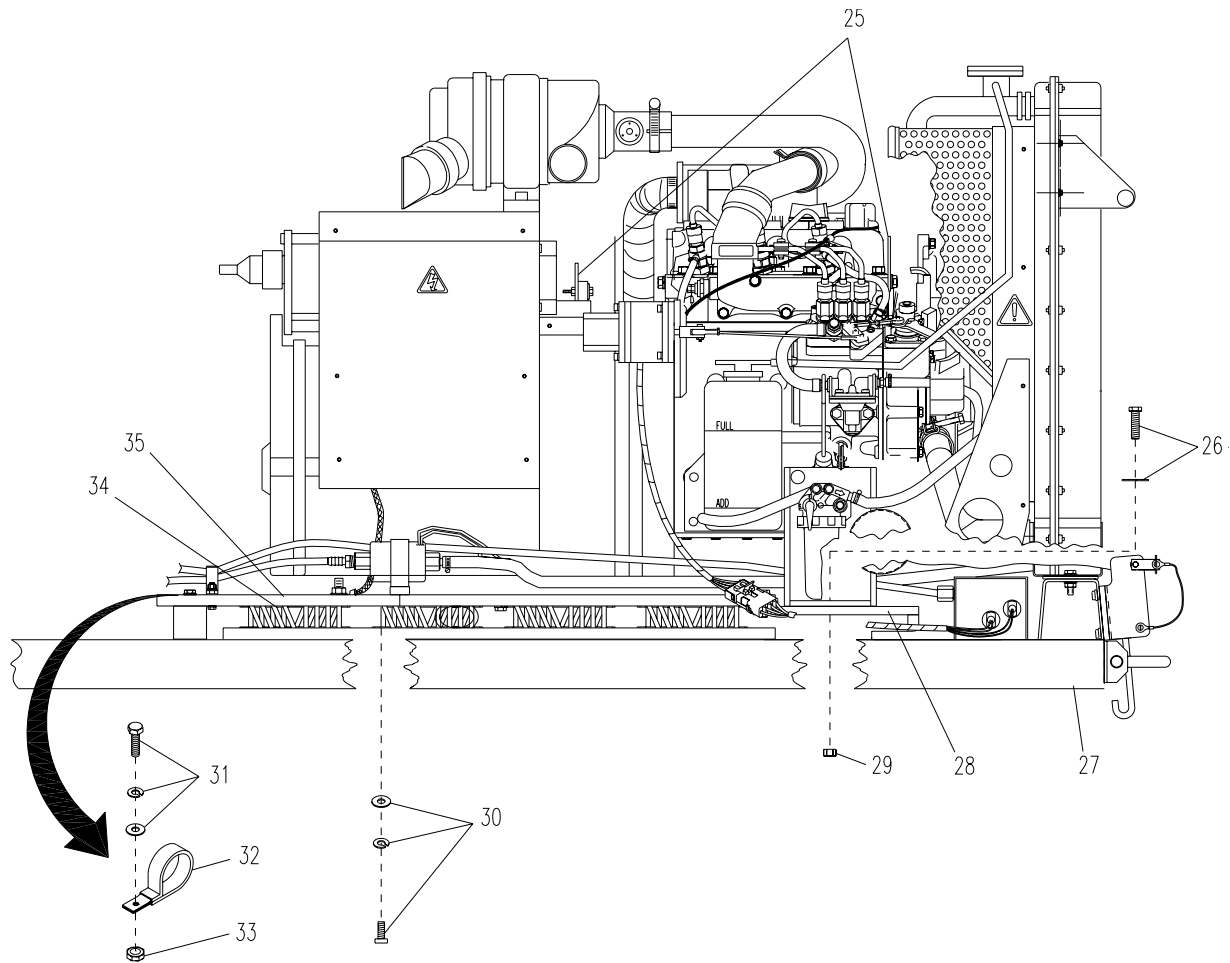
Frame Assembly and Vibration Isolator Mount Assembly (Sheet 5 of 6)
